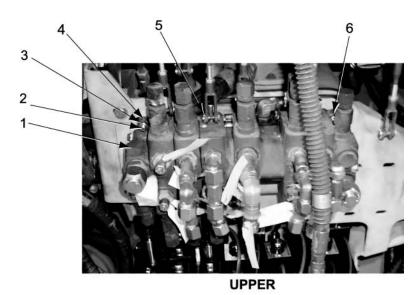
Mounting of DCV Bank and Suspension (Sprung/Unsprung) Valve/Upper View)
